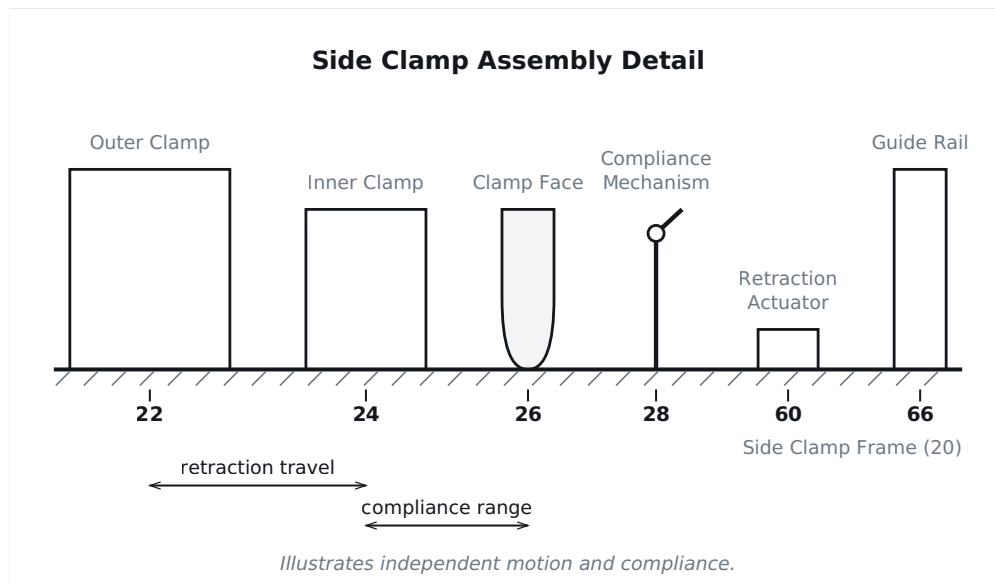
This drawing shows a cross-section of the side clamp assembly with its compliant face. PNG
